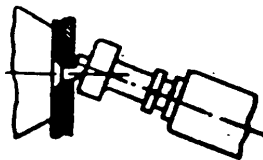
Outline of Riveting Flush-Type Rivets by the Direct Method
